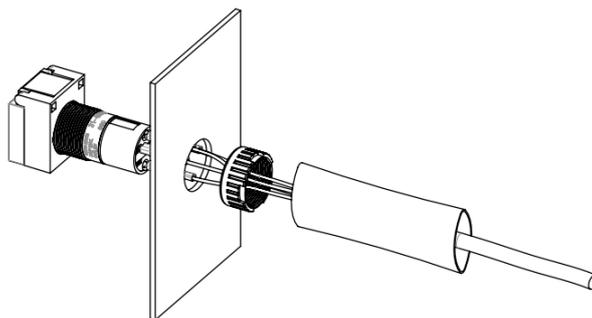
Install SSAS Alert & SSAS Test button (1 of 3)
